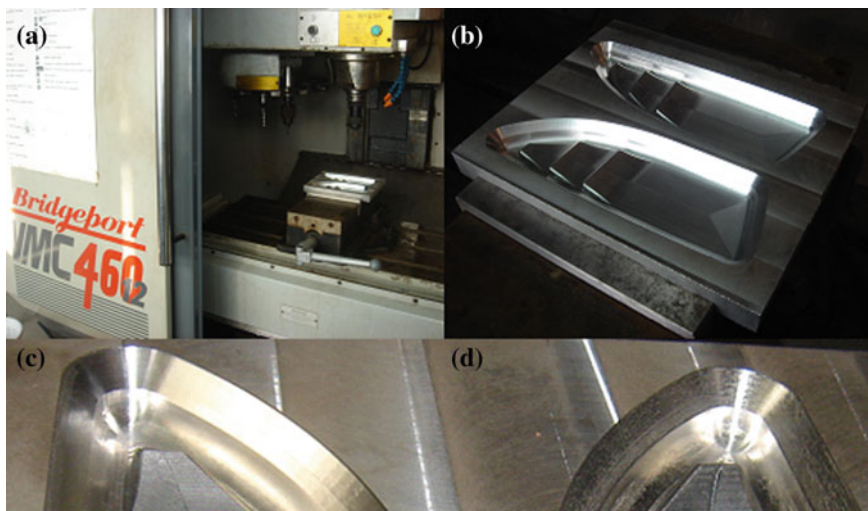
Actual machining of the 3-axis test part: a machining set-up; b finished part; c detailed surface result obtained via virus-evolutionary algorithm; d detailed surface result obtained via conventional GA
